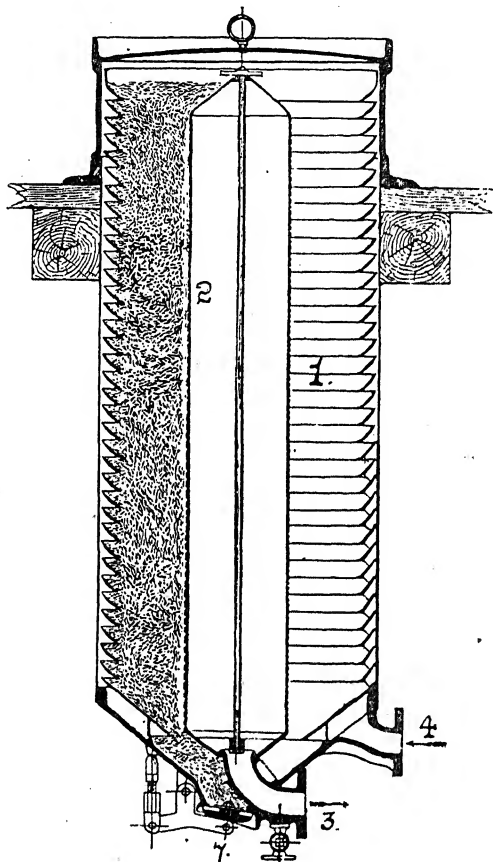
Enlarged section of one of the unit vessels forming a complete filtering battery, as shown in Fig. 102.
